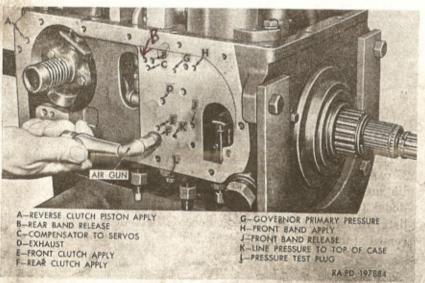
Location of passage holes for air-checking units with air gun assembly—B7950562.
